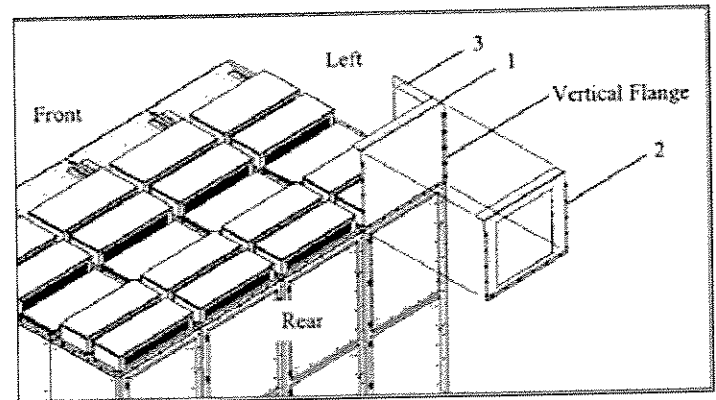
Detail of the Left Rear Corner of the Arc Exhaust Wall.
